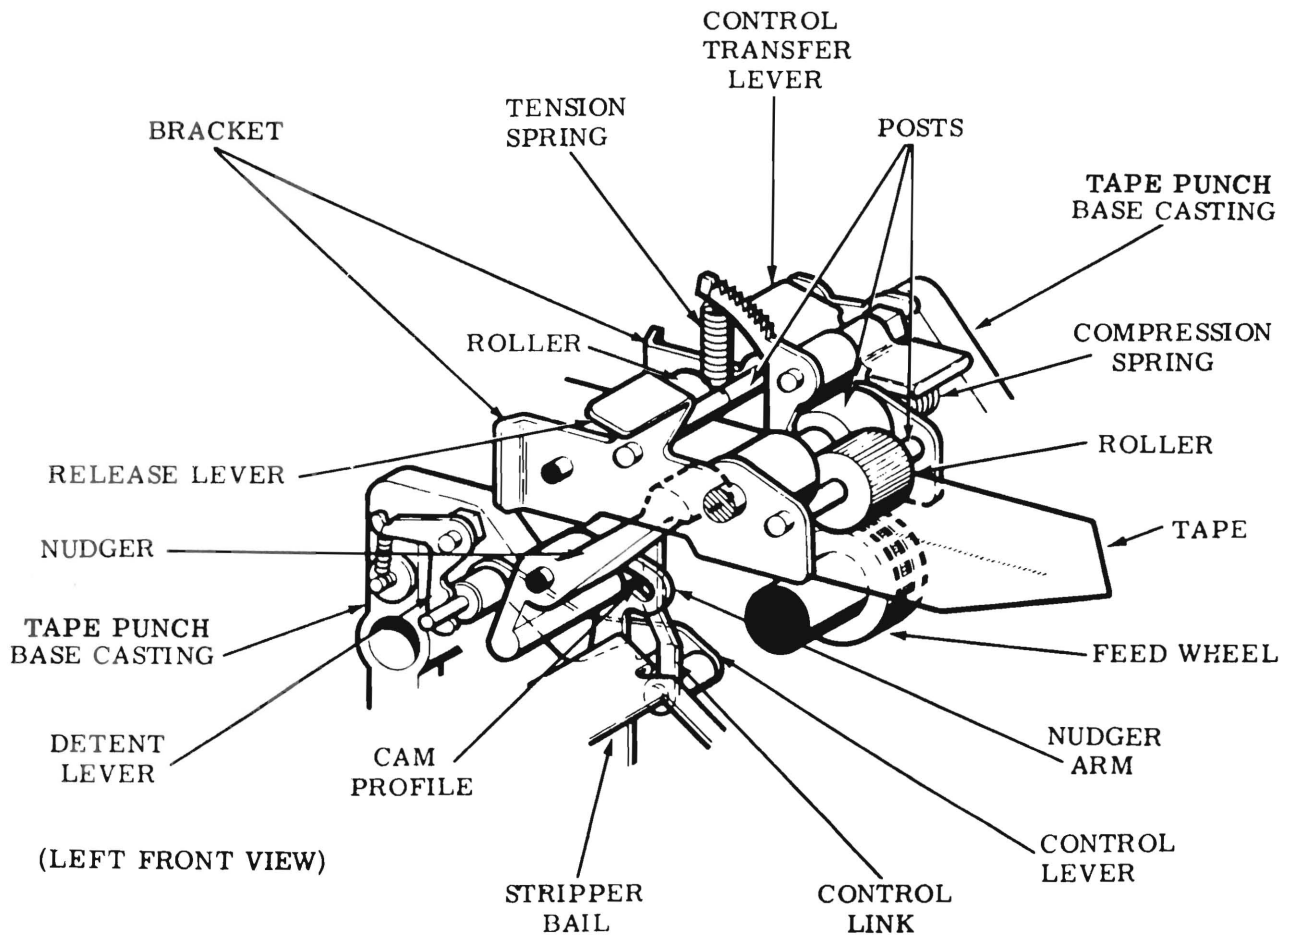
Tape Guide Assembly (Tape Feed Mechanism)
